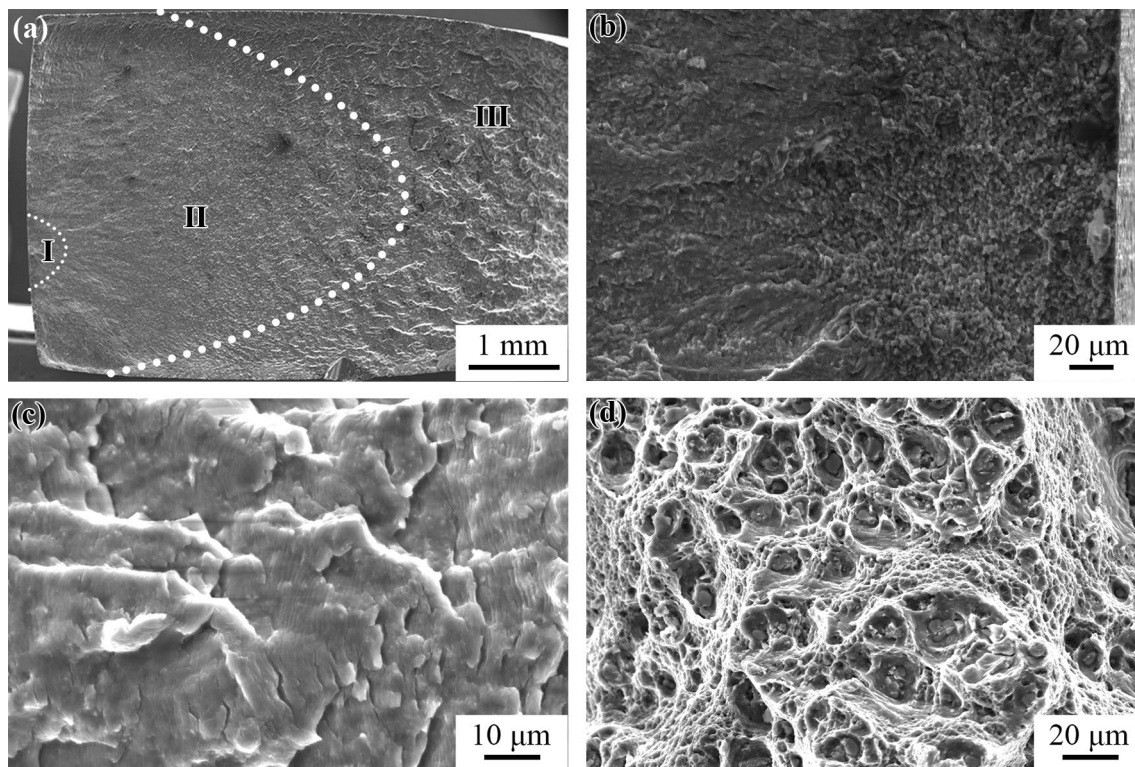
Fracture surface morphology of sample 300–400 at a maximum stress of 120 MPa: a low magnification overview, b crack initiation zone, c crack propagation zone, d final fracture zone
